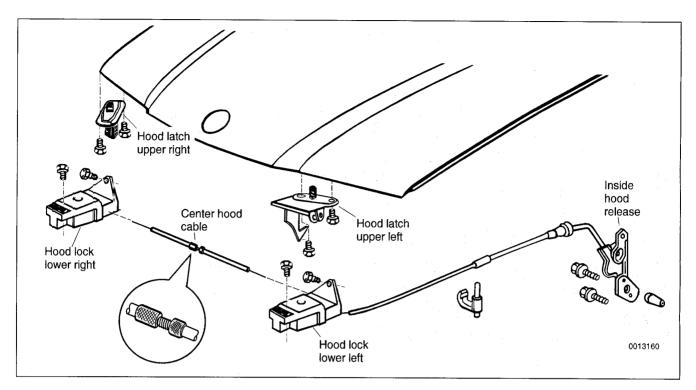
Hood locking components. Cable adjusting section shown at inset.
